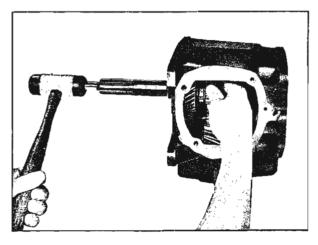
Removing Clutch Gear and Bearing Assembly
